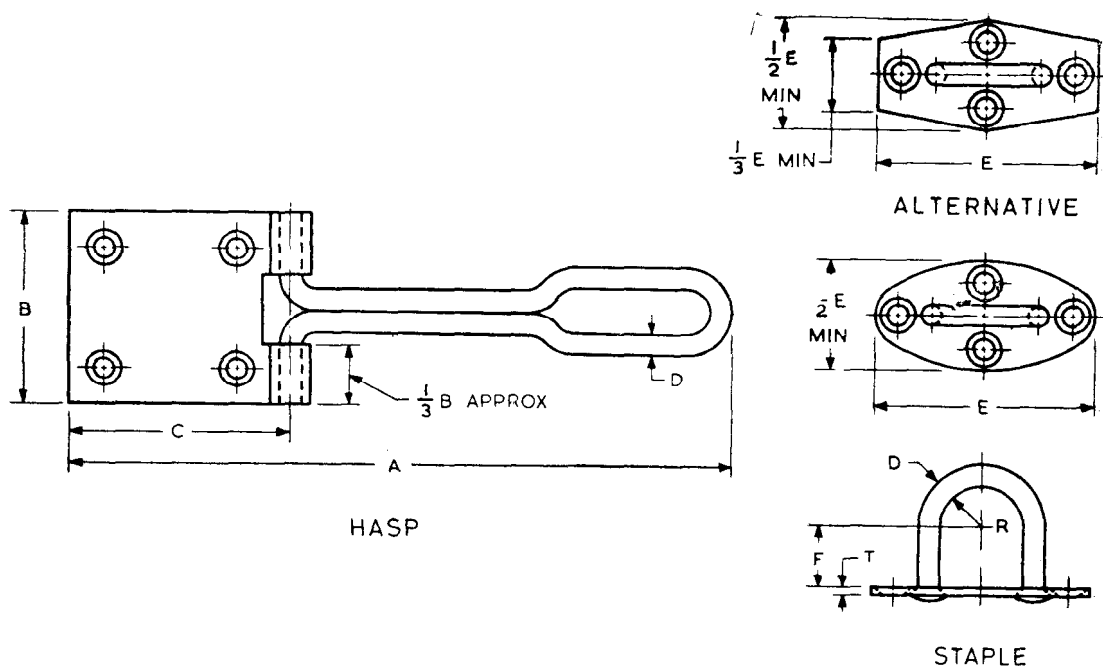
MILD STEEL HASPS AND STAPLES — WIRE TYPE
